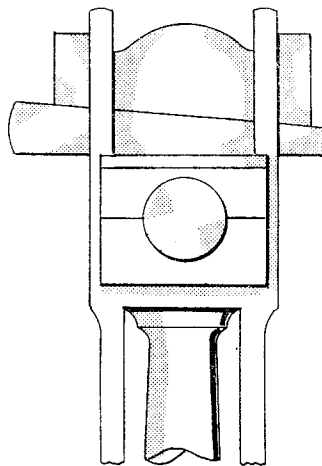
Bearings of the piston-rod linkage, No. 1 engine
